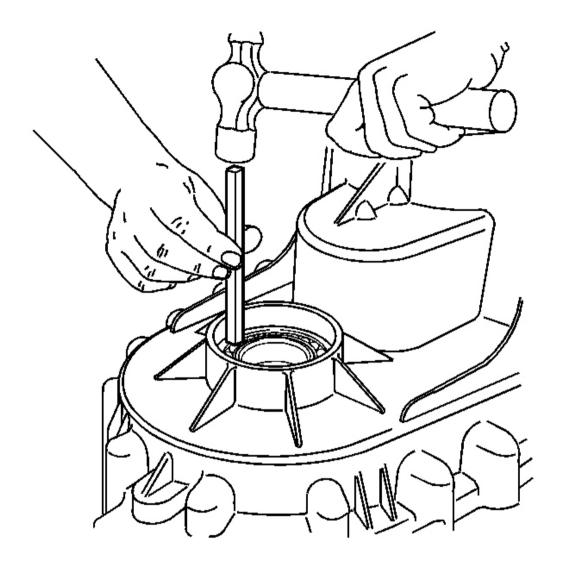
Removing Front Output Shaft Bearing Courtesy of GENERAL MOTORS CORP.
